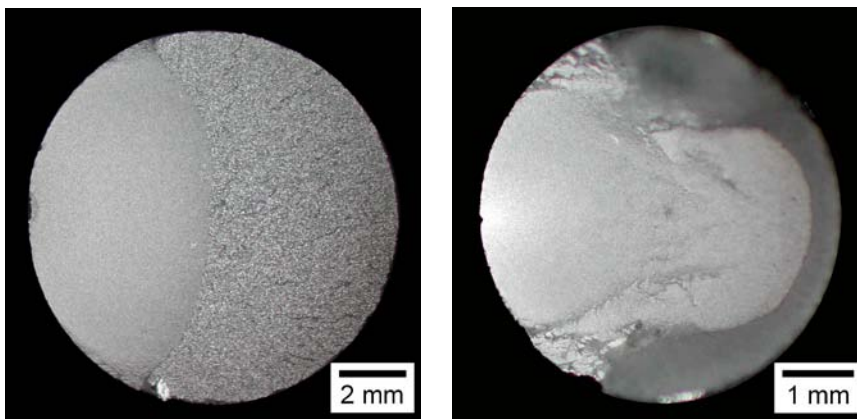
Fracture surface in the specimens after the Whöler tests: hot rolled bar (left) and prestressing steel wire (right). In both images the fatigue crack growth direction is from left to right
